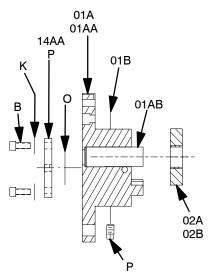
Head Coverplate Kit, Head Kit And Idler Disassembly
